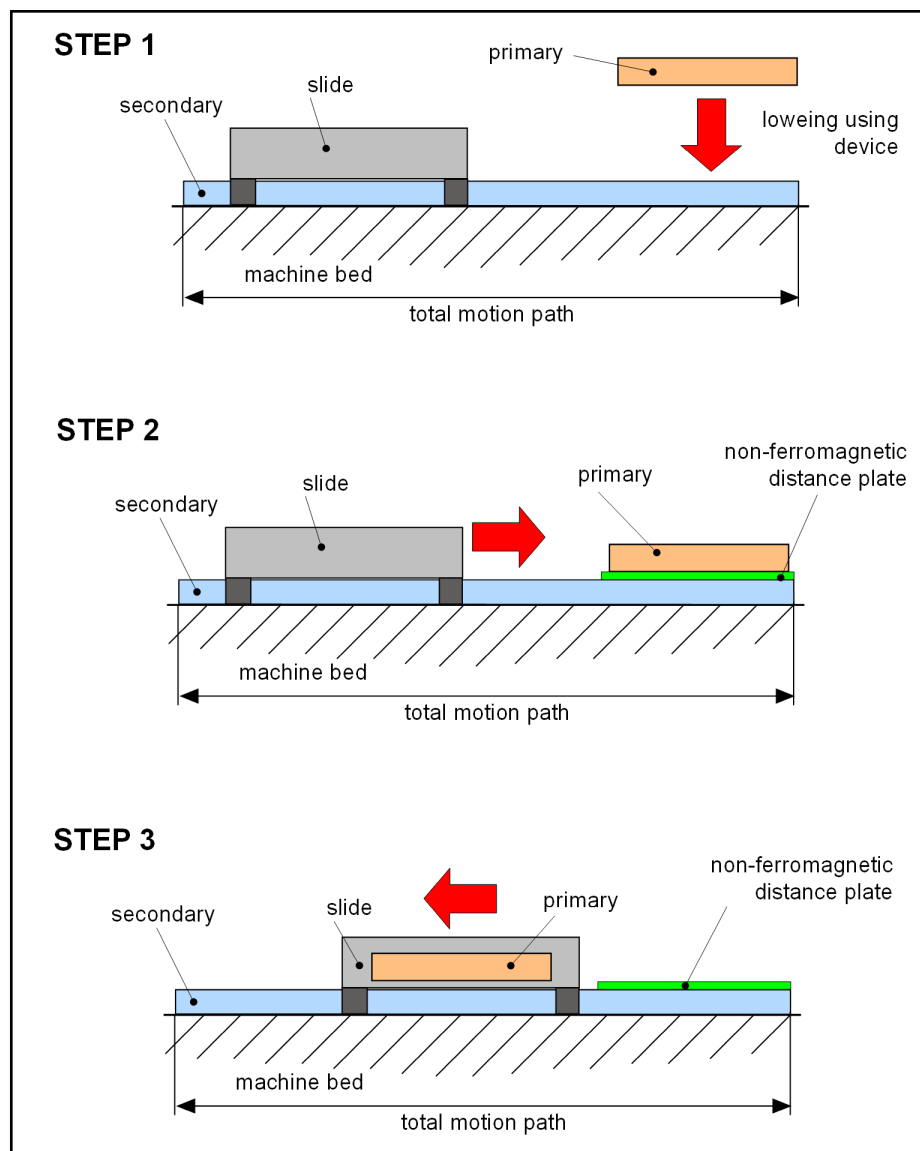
Installation of the linear motor components at whole secondary part over the entire traverse path
